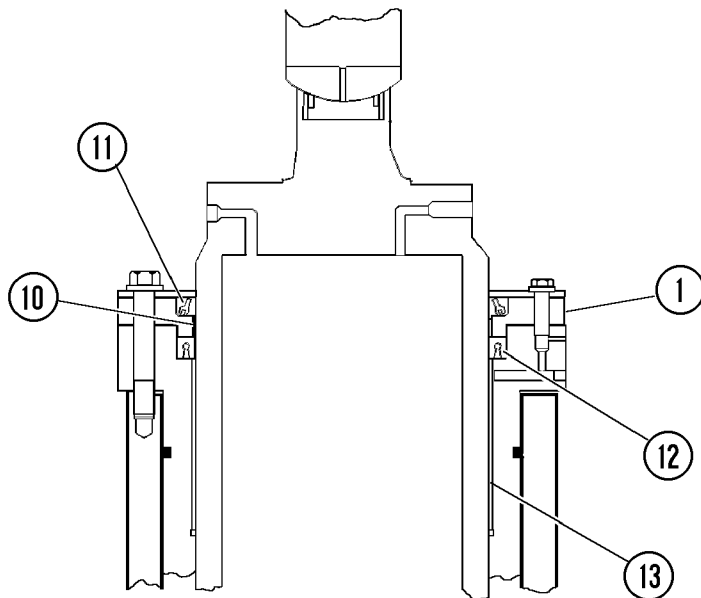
FRONT SUSPENSION ASSEMBLY
